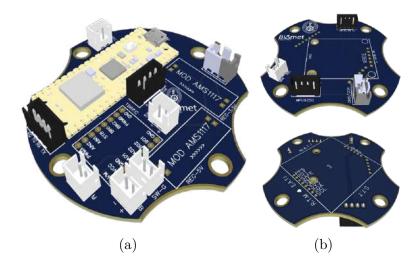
Upper part of the CanSat: a) PCB 1 and b) PCB 2
